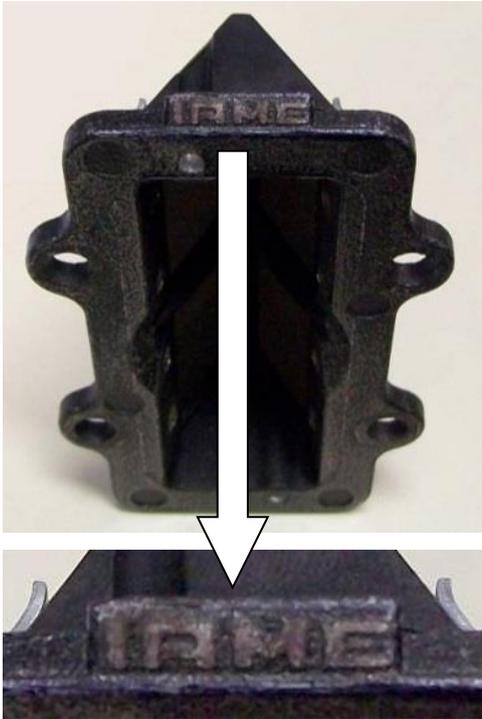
PHOTO IDENTIFICATION CARBURETOR INLET CONVEYOR
